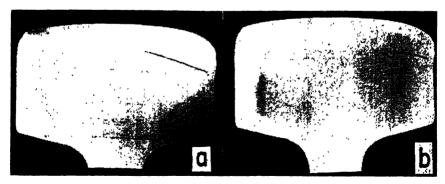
Cross-Sections of Rail 602 Showing Internal Shelling Cracks.
